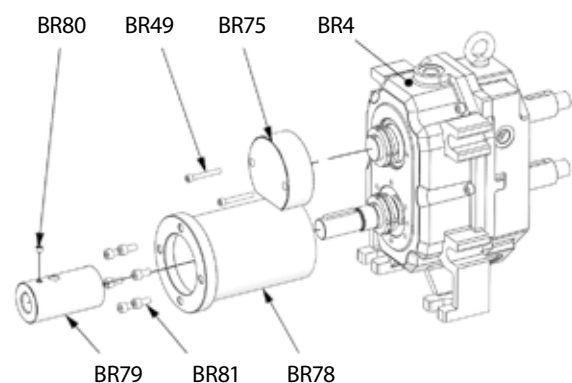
Disassembly of the gearcase step 1 version H.
